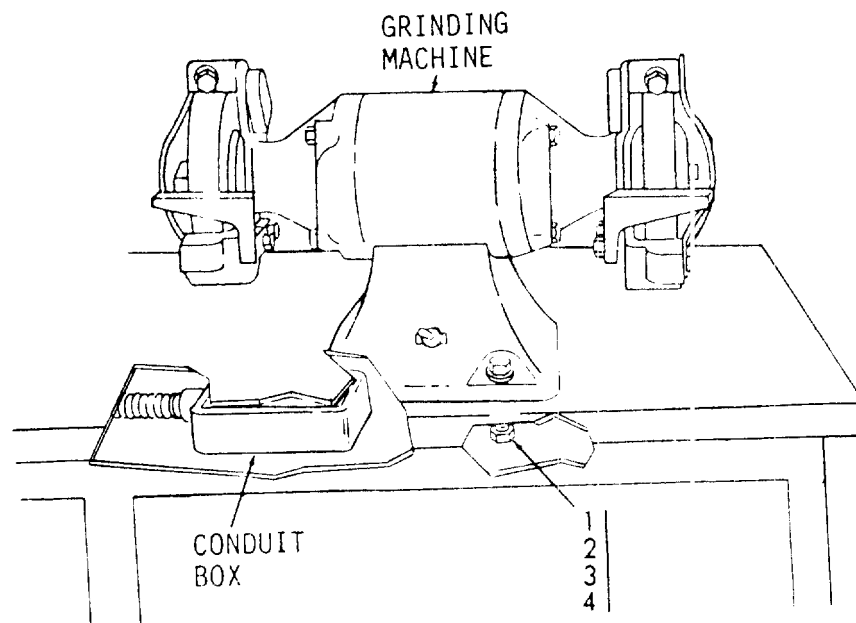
Utility Grinding Machine, Workbench and Panel Assembly.
